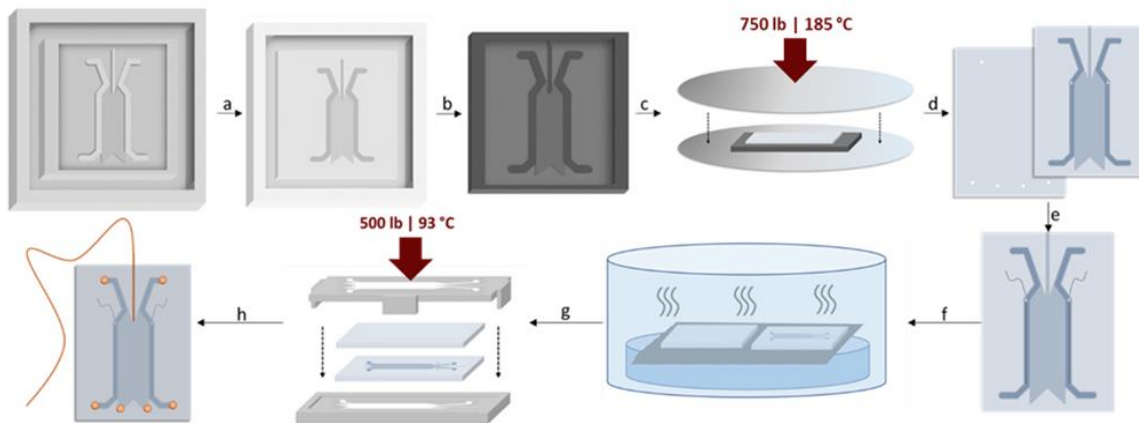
Schematic of μ FFE device fabrication in COC using hot embossing. (a) Cast master mold in silicone. (b) Recast silicone mold in Weicon C. (c) Hot embossing. (d) Drill inlet, outlet, and electrode holes. (e) Attach electrodes. (f) Cyclohexane vapor exposure. (g) Bond under heat and pressure in bonding rig. (h) Attach buffer ports and sample capillary.
